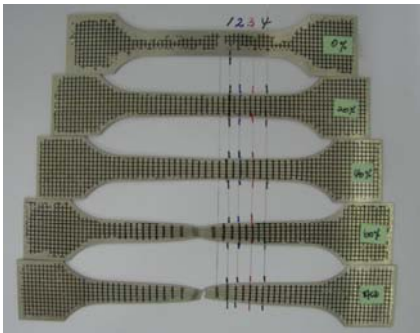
Grid-printed tensile test specimen and grid points for measurement at 250°C
